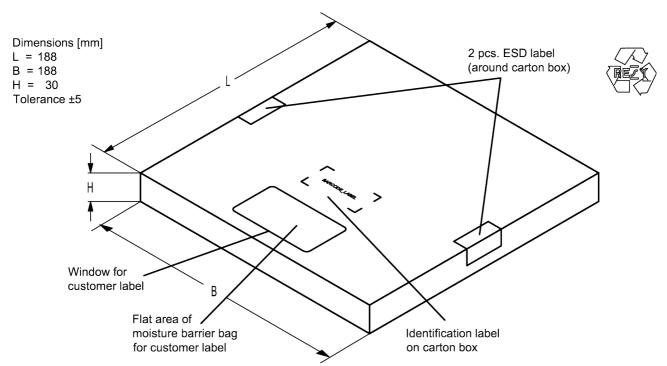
Drawing of folding box for reel with diameter of 180 mm.
